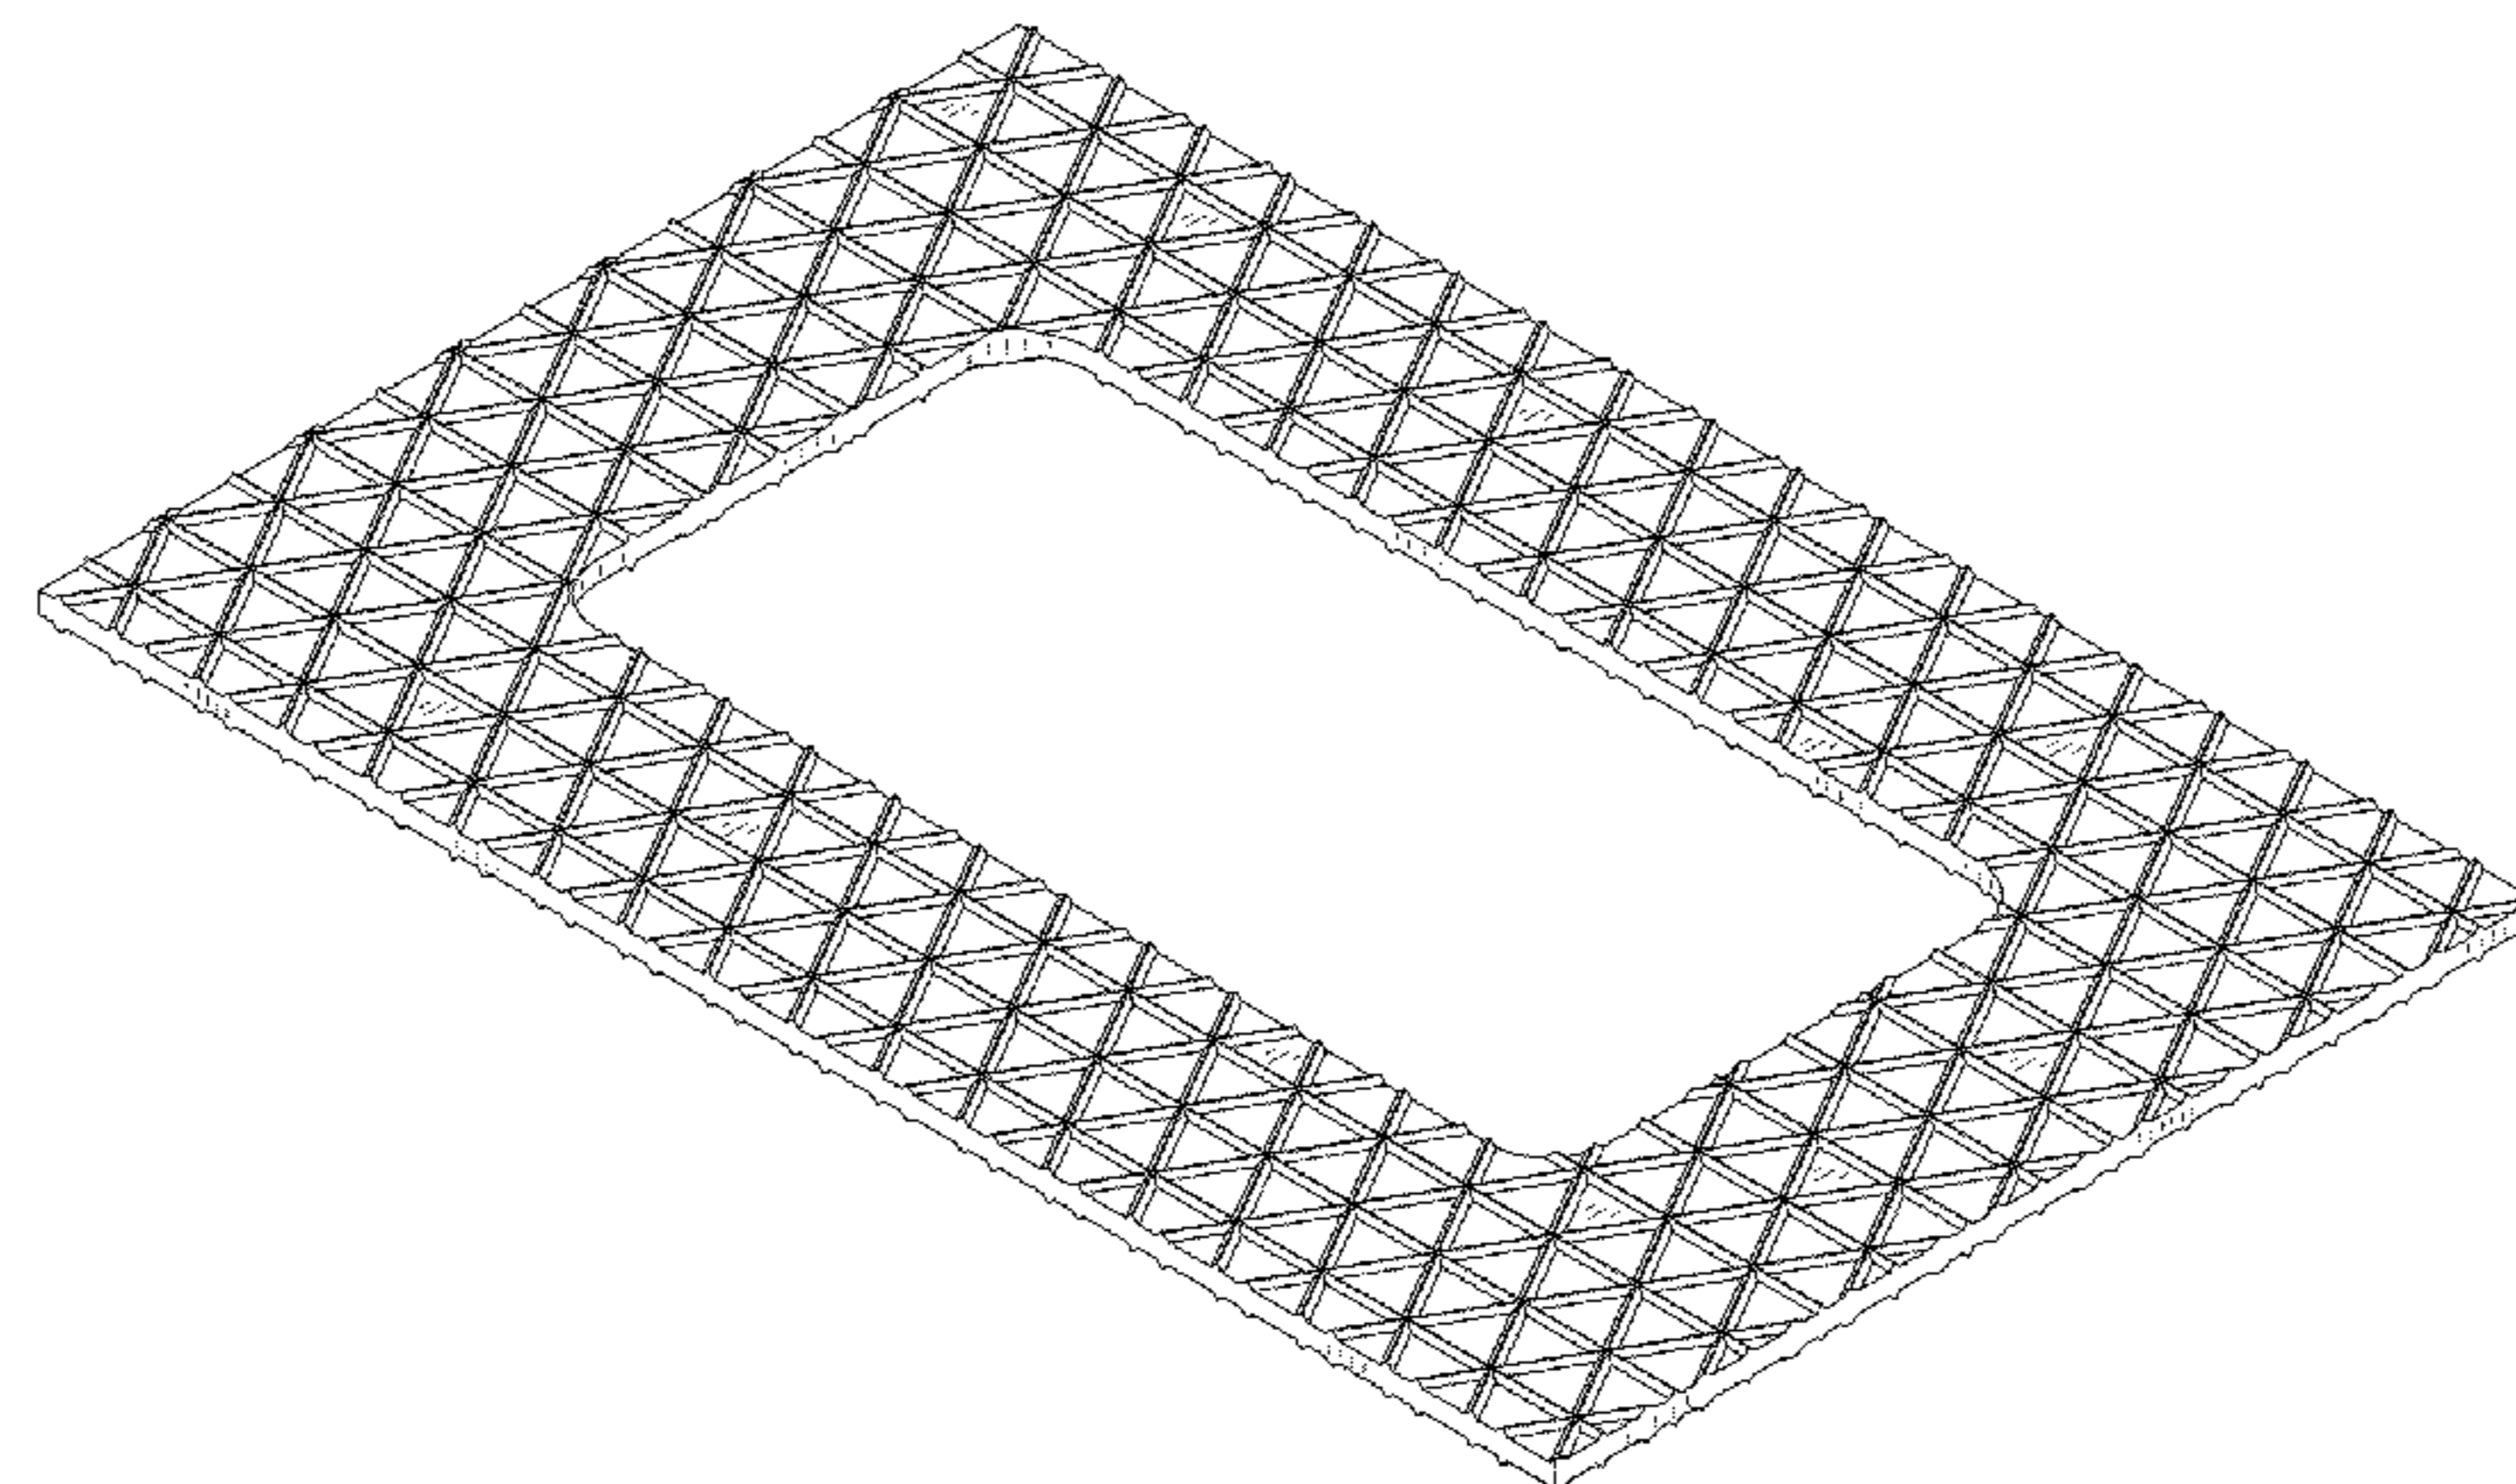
is a front perspective view of a gasket having raised sealing surface pattern;
